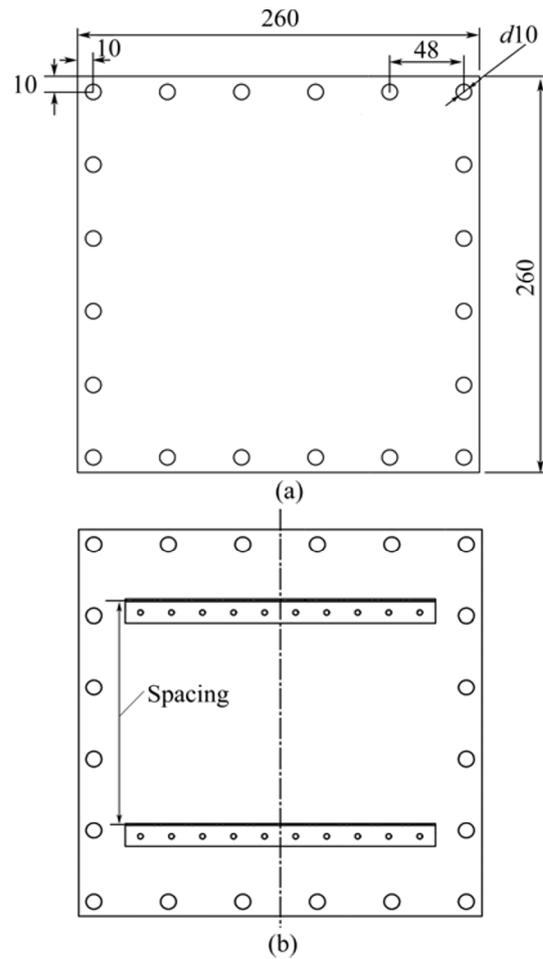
Dimensions of different specimens (unit: mm): (a) 2024-T3 plate specimen; (b) Stiffened plate specimen
